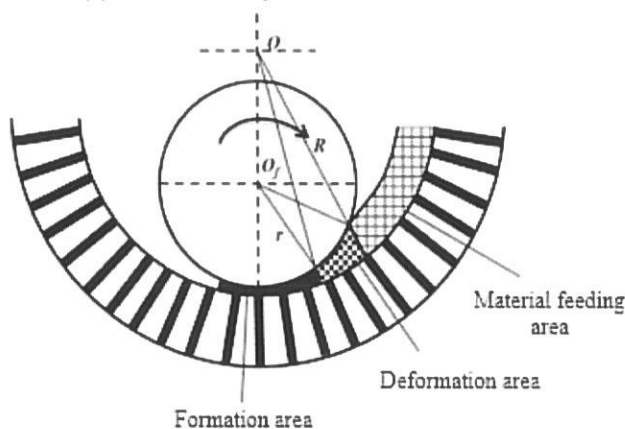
Diagram of the pelletizing mechanism in ring die pelleting machines, [82]
